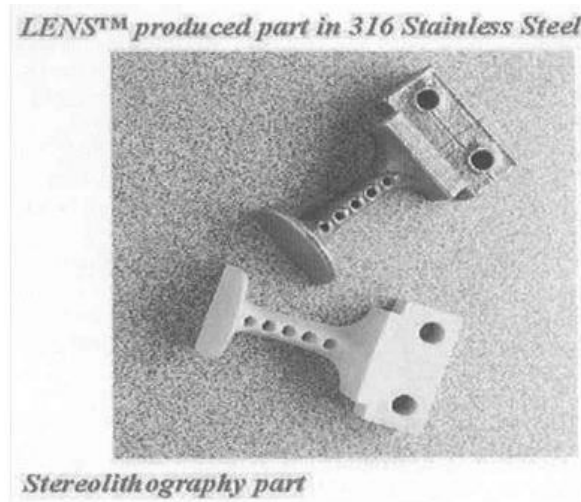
Sample LENS part next to a polymer RP component (Courtesy of Optomec Design Company).
